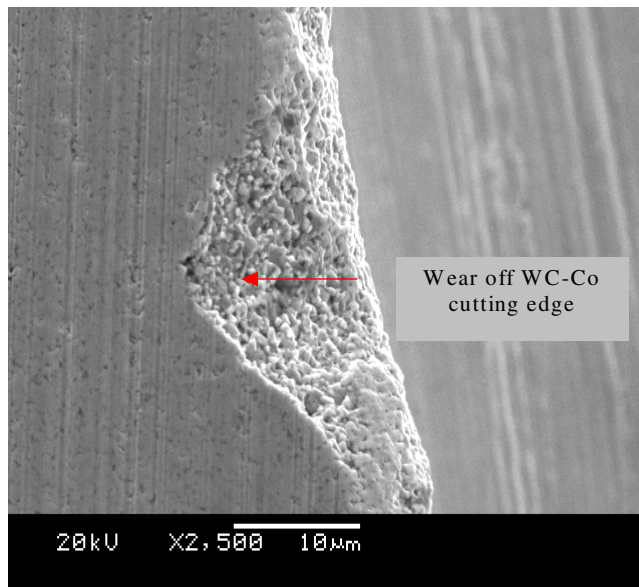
The cutting edge of an uncoated WC-Co dental bur after machining with glass.
